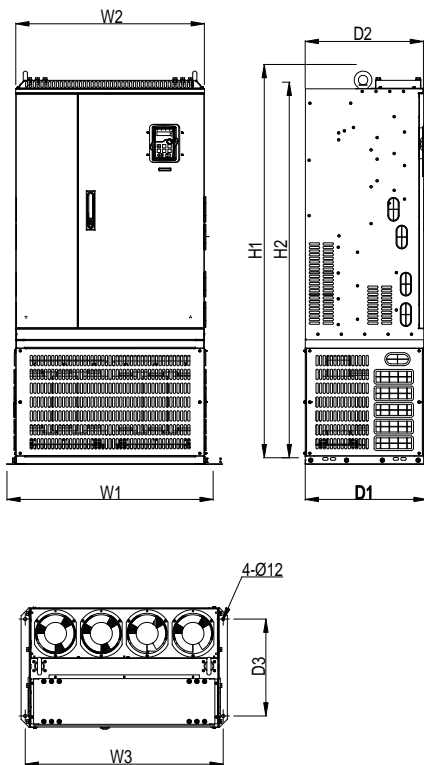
Single-unit installation dimension for 380V 280–315kW and 660V 355 kW models
